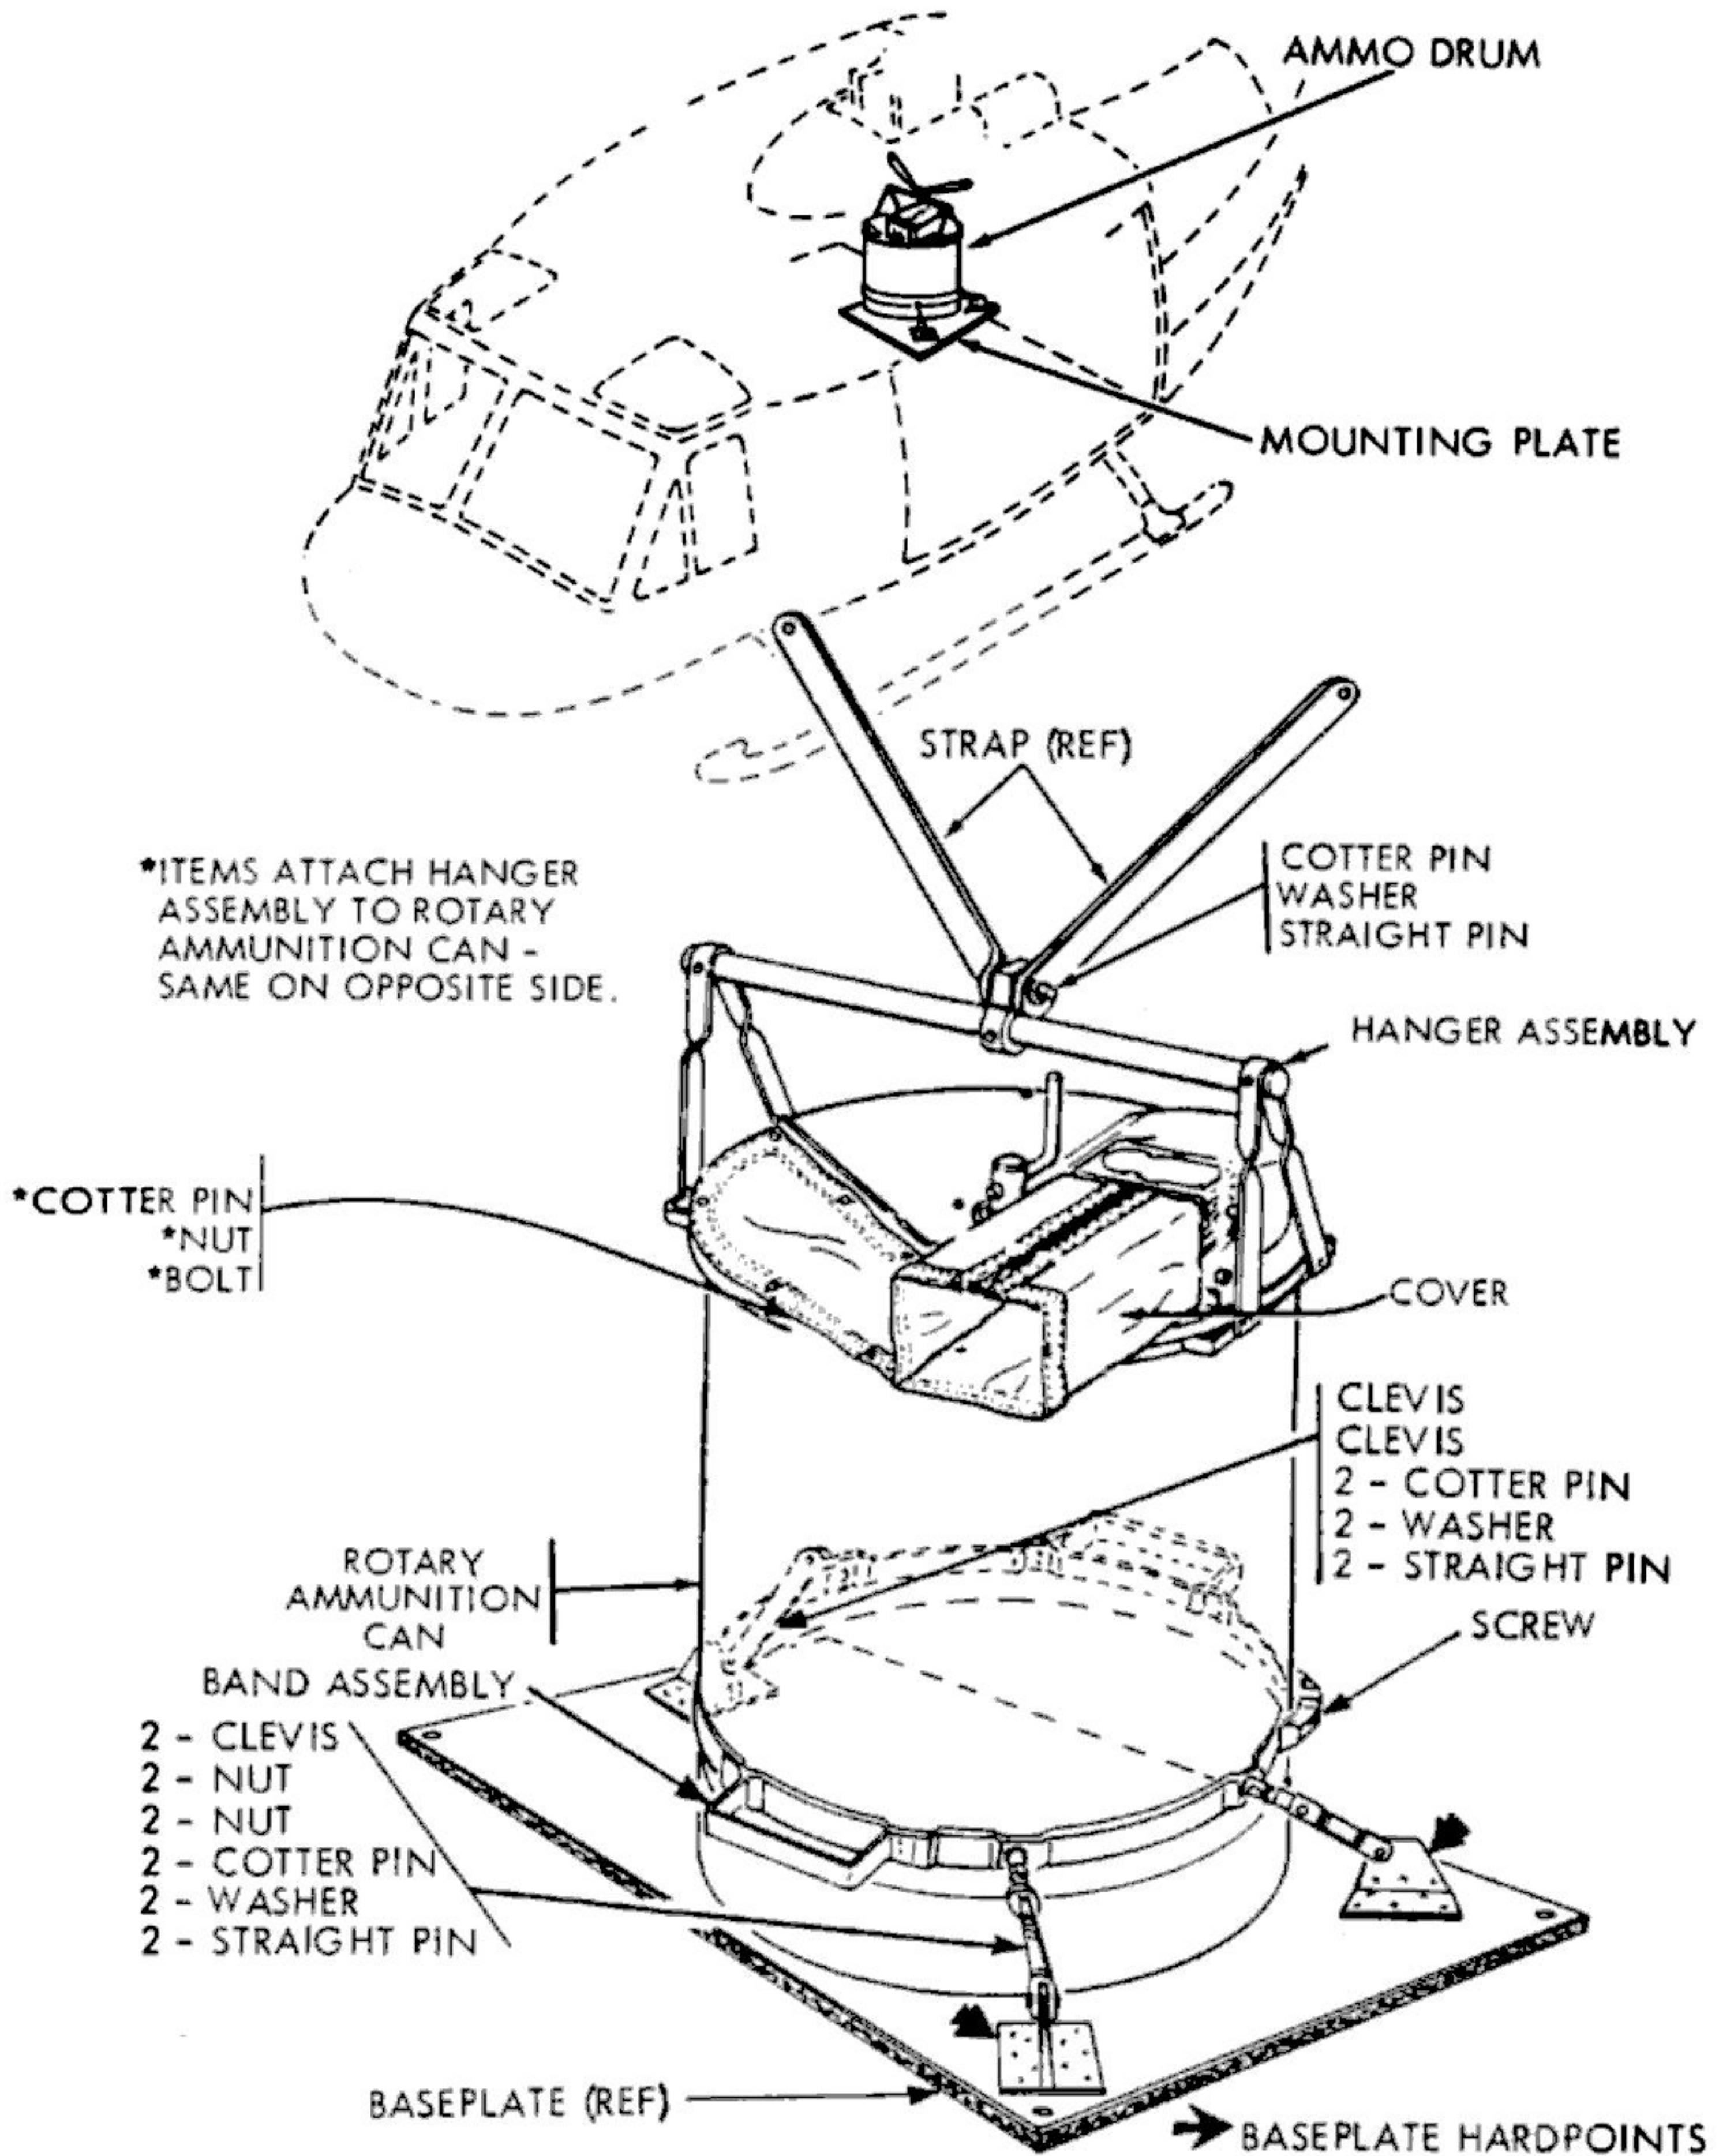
Installation/removal of 40 millimeter grenade rotary ammunition can.
